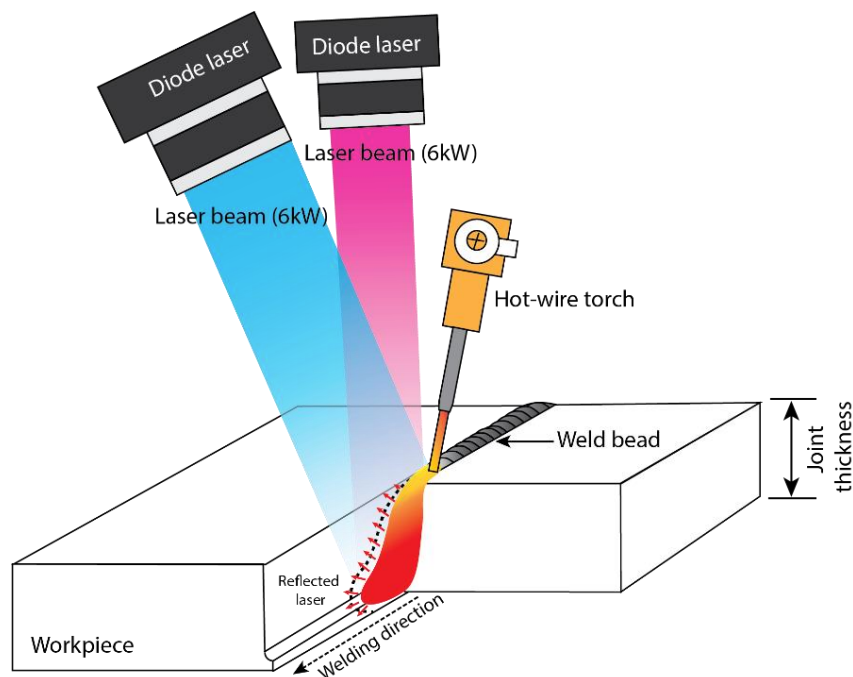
Schematic illustration of double laser beam welding in narrow groove.
